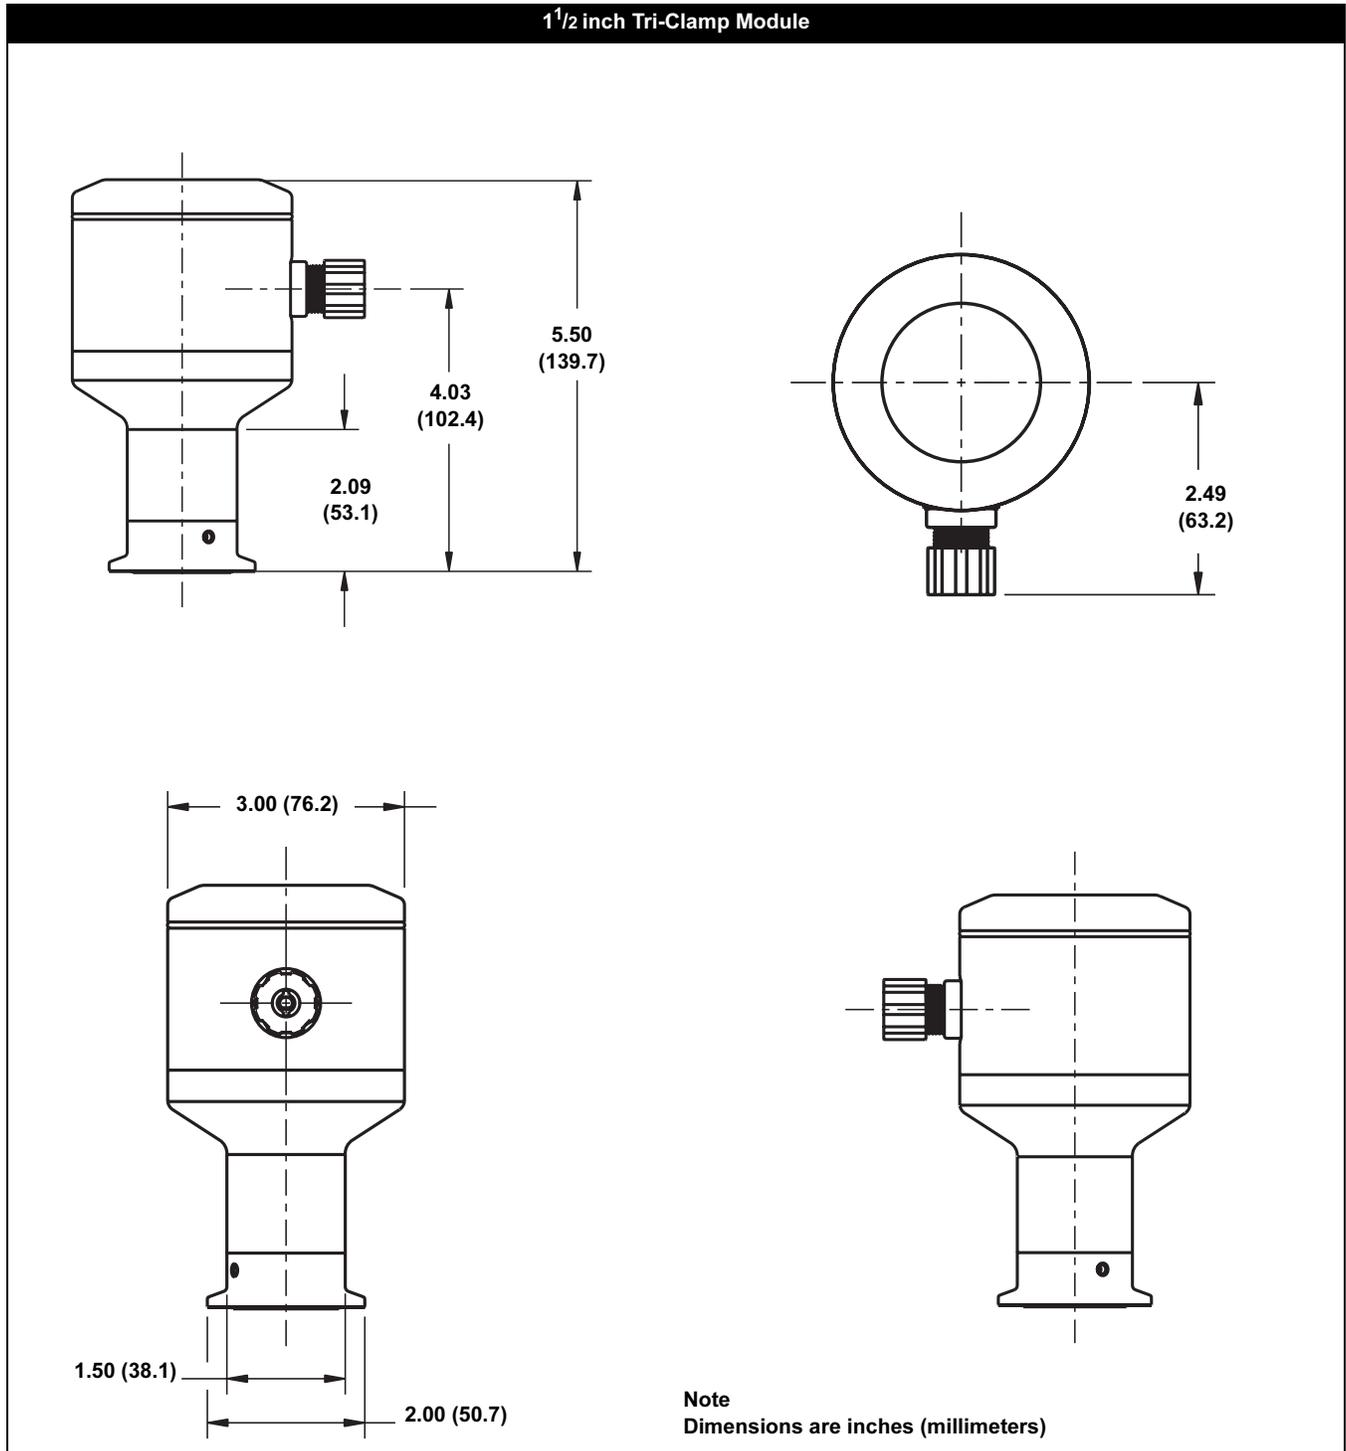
Dimensional Drawings for the Rosemount 4500 Hygienic Pressure Transmitter
